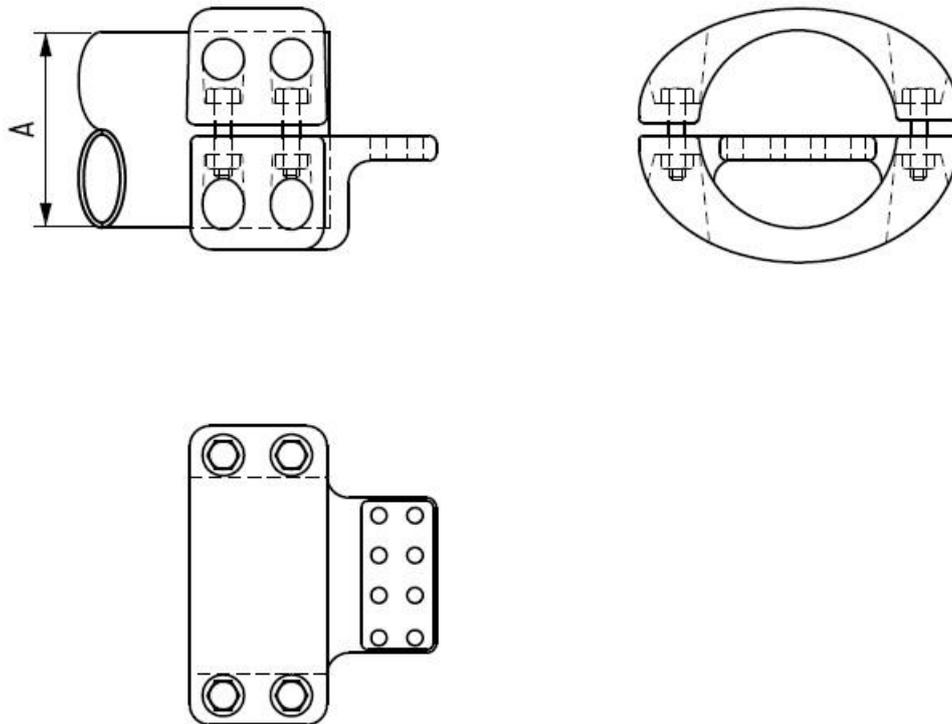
ECC-8HH: Coupling Clamp – 8-Hole Horizontal Palm – Equipment Mounted
